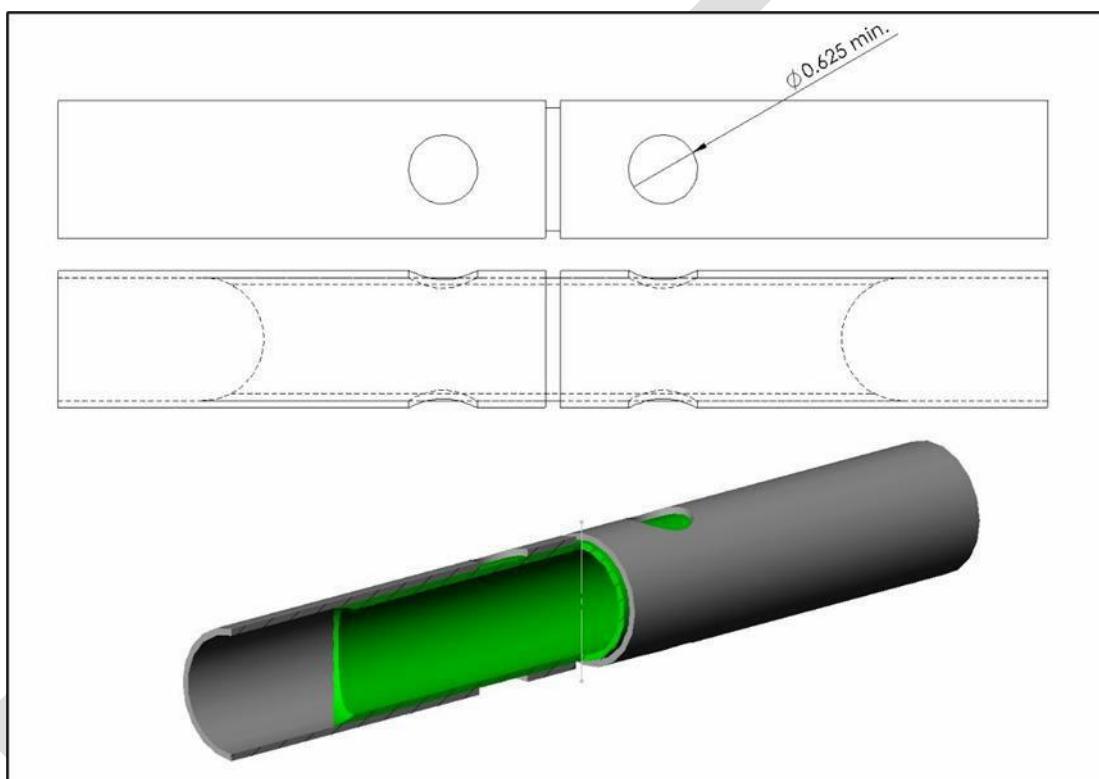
Roll Cage, Butt Joint Tube Sleeve
